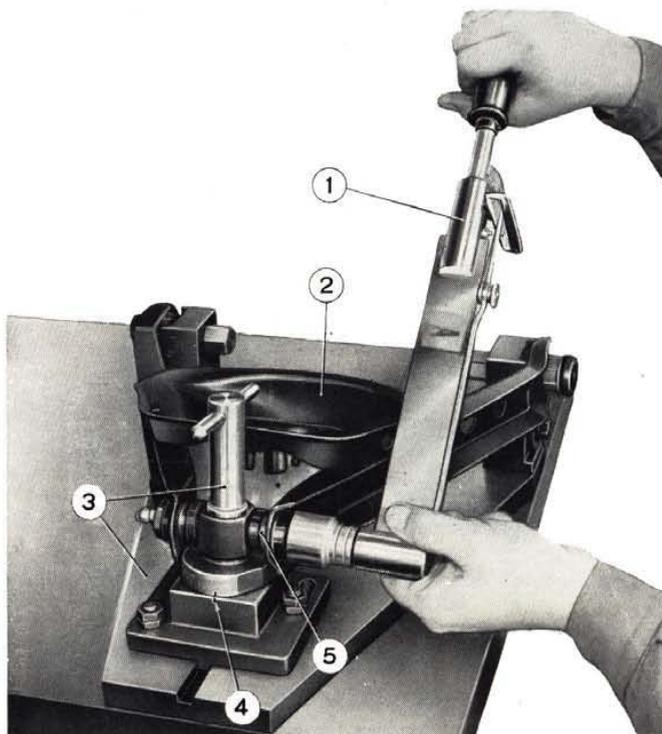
Installing lower control arm self-threading bushings. 1. Torque wrench. - 2. Coil spring housing. - 3. Fixture A. 74023. - 4. Location marks to be indexed. - 5. Self-threading bushings.
